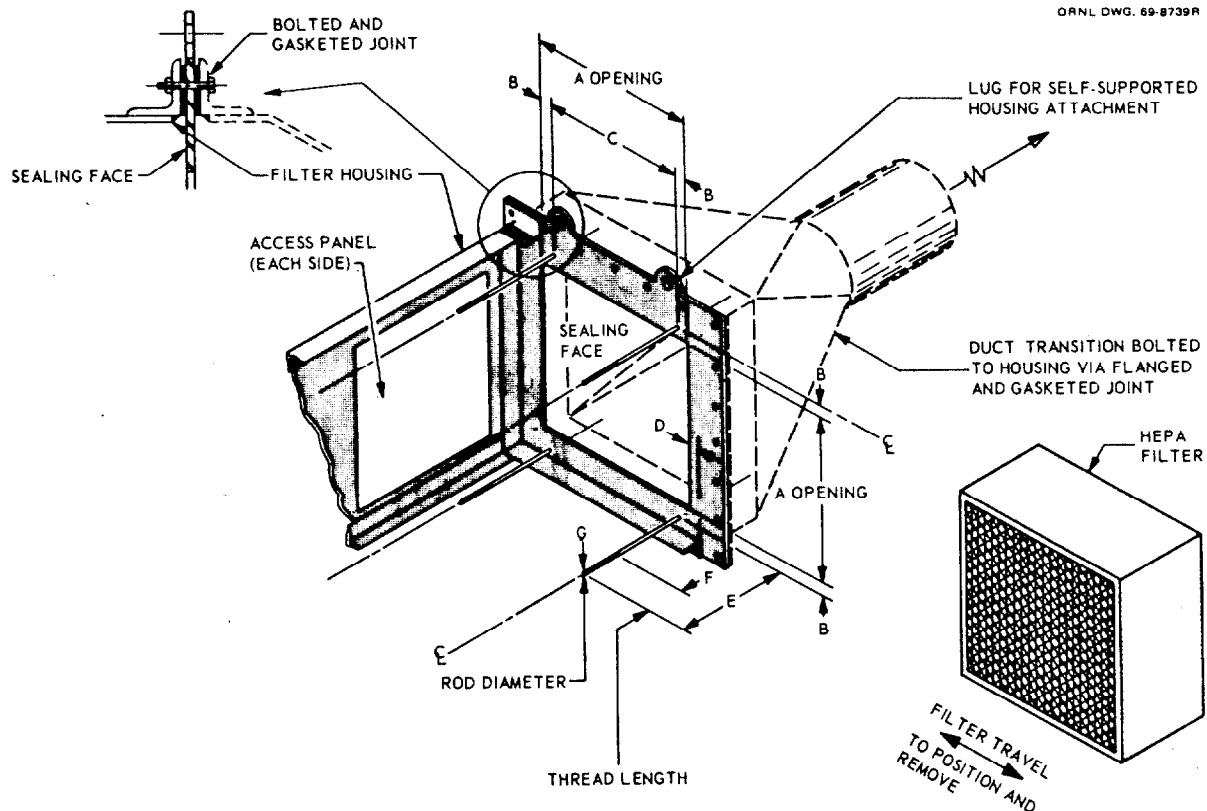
shows a nonwelded mounting frame consisting of a single $\frac{1}{4}$ -in. plate that is sealed by gaskets between the flanges of the body and transition of a field-assembled housing. The filter is clamped by bolts and installed through a hatch in the side of the housing. As noted in Chap. 4, bolted clamping provides the maximum in reliability (provided the bolts are large enough) and ability to adjust to dimensional variations of the filters. As noted in Sect. 4.3.4, a gasket compression of at least 80% is needed to effect a reliable seal between a high-efficiency device such as a HEPA filter or radioiodine adsorption cell; this requires a gasket loading of something over 20 lb per square inch of gasket area, or a total loading of over 1400 lb for a 24- by 24-in. filter. Such loadings are easily accomplished with the bolted clamping method shown in Fig. 6.7. Most commercial single-filter housings, however, employ a four-bar linkage or cam arrangement, of which those noted in Figs. 6.5 and 6.6 are typical. Some are adjustable to accommodate dimensional variations that occur from one filter element to the next, and some are not adjustable. It is important for the designer to verify that the clamping mechanism of the commercial housing he is considering can develop the loading required and is adjustable. All parts of the mechanism should be stainless steel to prevent rusting and seizing under operational conditions. This includes springs, which tend to break when rusted. The only exception to this rule is that nuts, if
